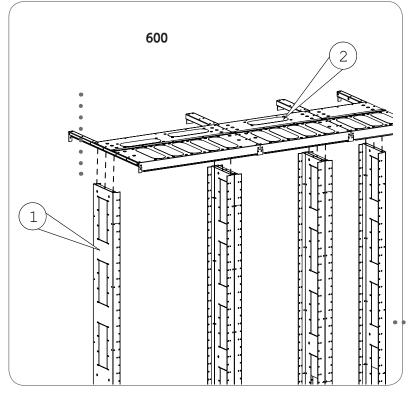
Assembly of roofs on a 600 deep E-serie cell centre is started with the middle sections, and then you fasten the front plates.
